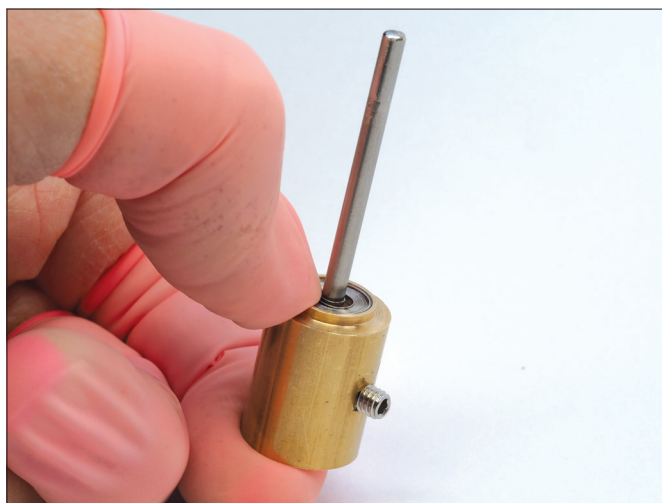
The handle is removed and the arbor extracted upwards, using a thumb or finger to keep the spring in place.
